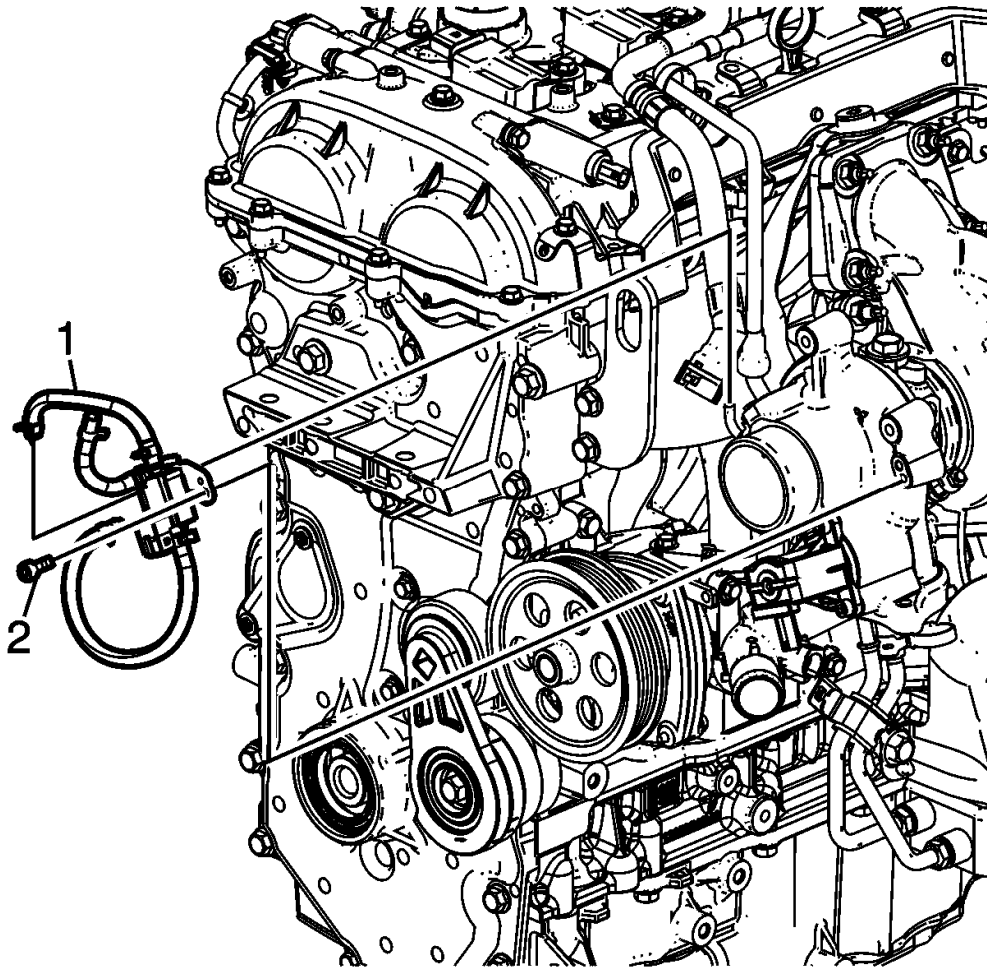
Turbocharger Wastegate Regulator Solenoid Valve
